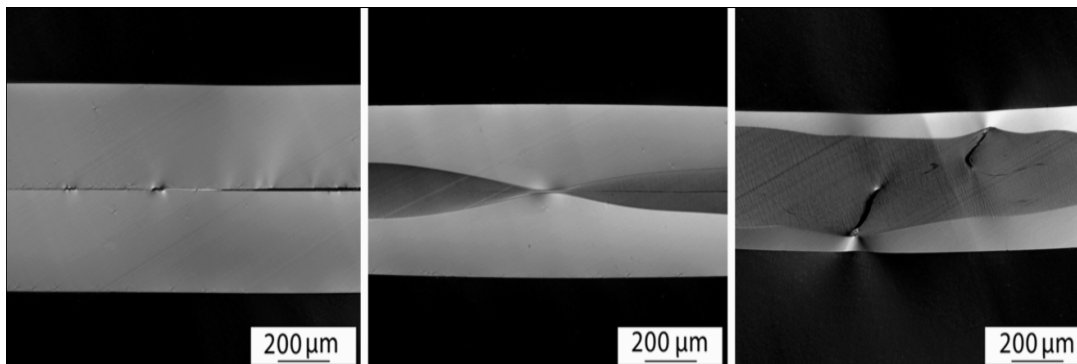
Micrographs of ultrasonic welded PLA films, 305  $\mu\text{m}$  thickness, detailing weld zones and crack formation in the weld line (left: welded 0.15 sec, center: welded 0.25 sec, right: welded 0.35 sec)
